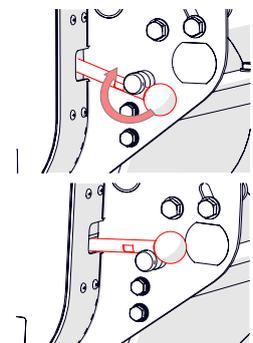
A - Parking brake disengaged (top), and engaged (bottom).
